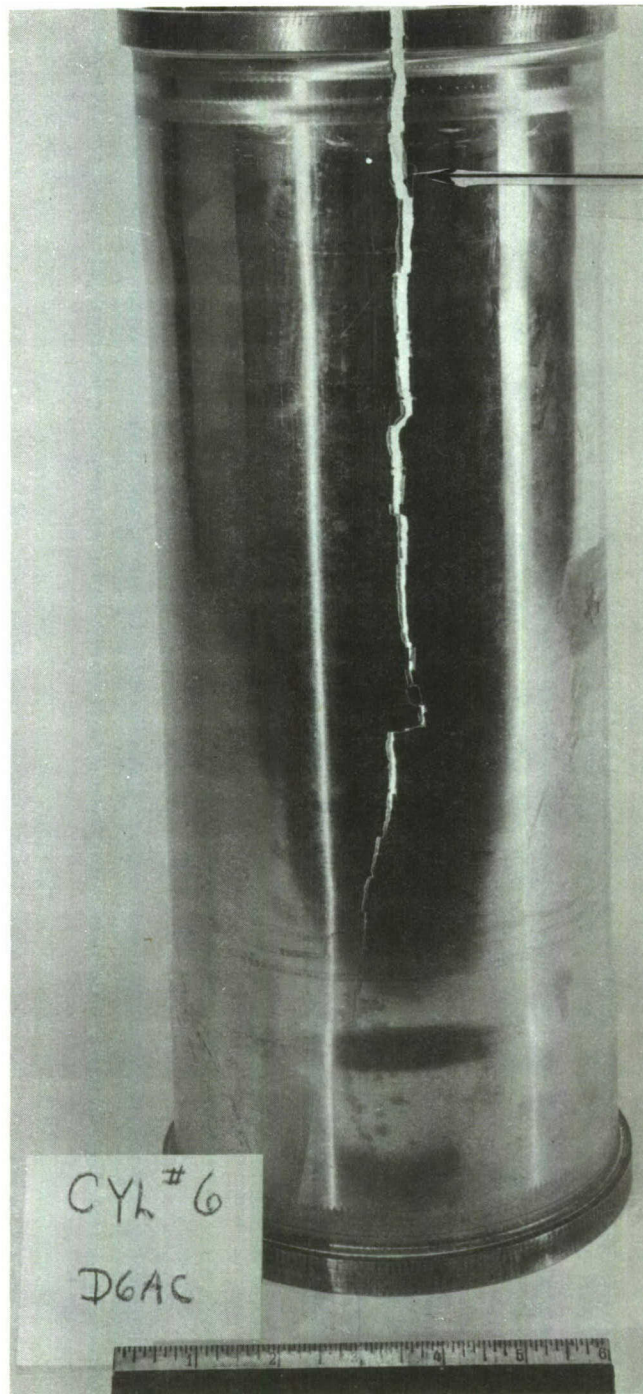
D6AC Cylinder No. 6 After Burst. Arrow Points to Fracture Origin.
